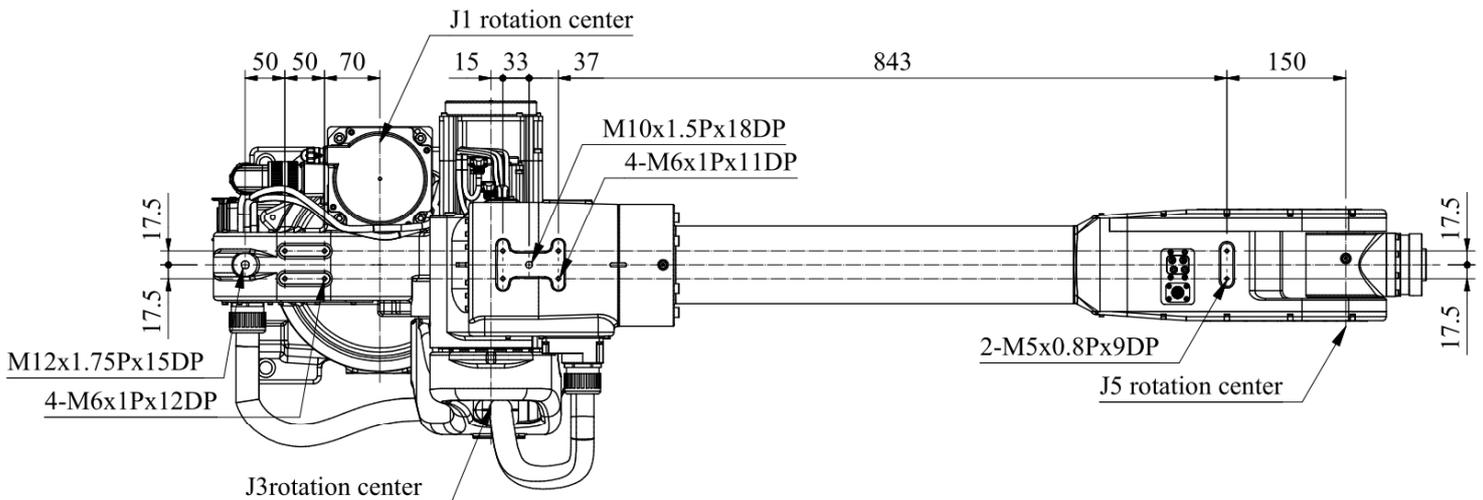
(e) RA610-1869-GA Mounting surfaces on the robot
